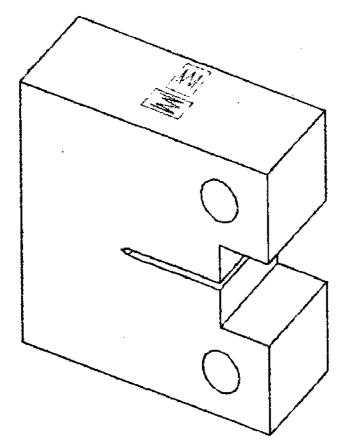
Strain Gages Mounted on C(T) Specimen for Measurement of Transmitted Force
